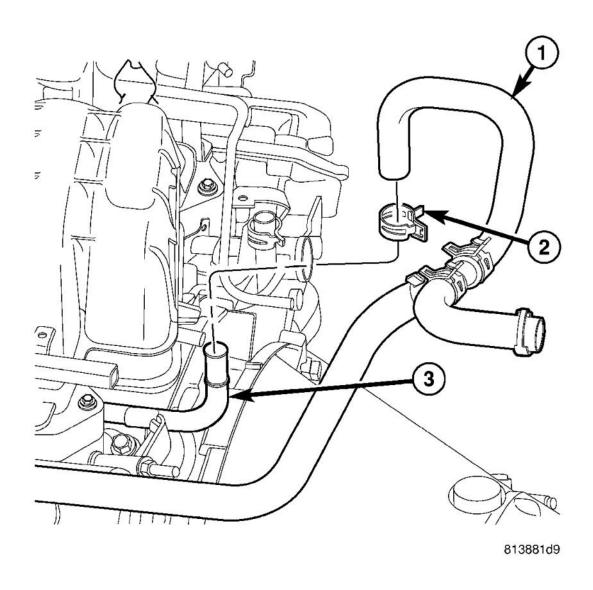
Heater Hose Return Courtesy of CHRYSLER LLC
